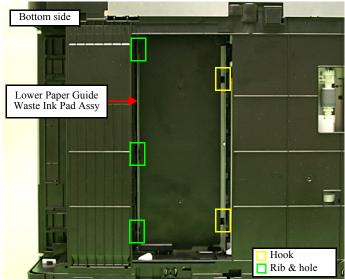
Removing the Lower Paper Guide Waste Ink Pad Assy
